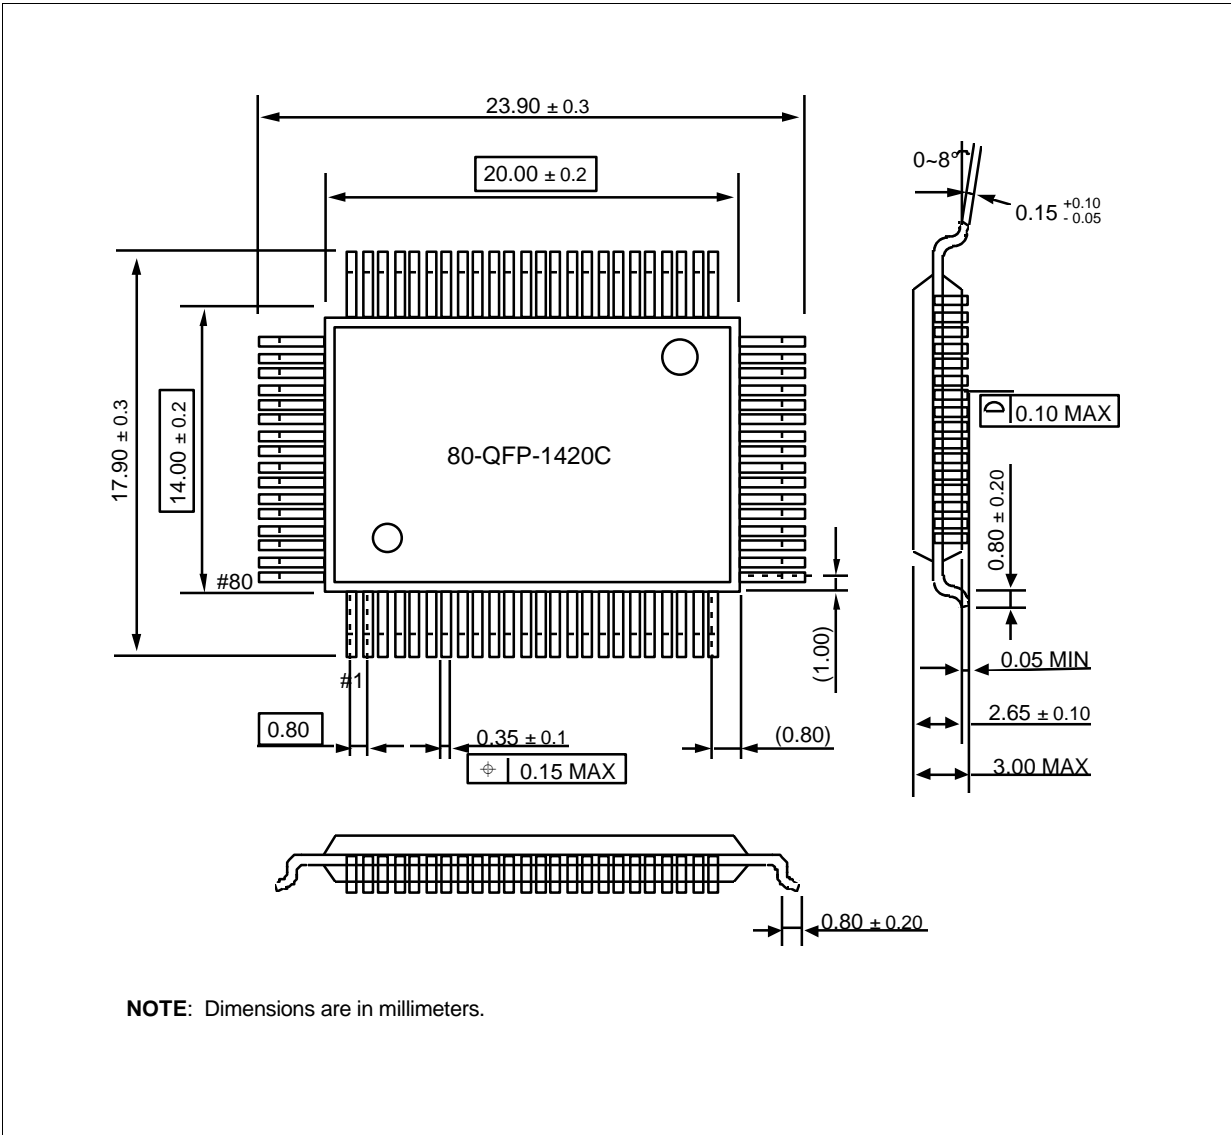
KS88C4404 QFP Standard Package Dimensions (in Millimeters)
